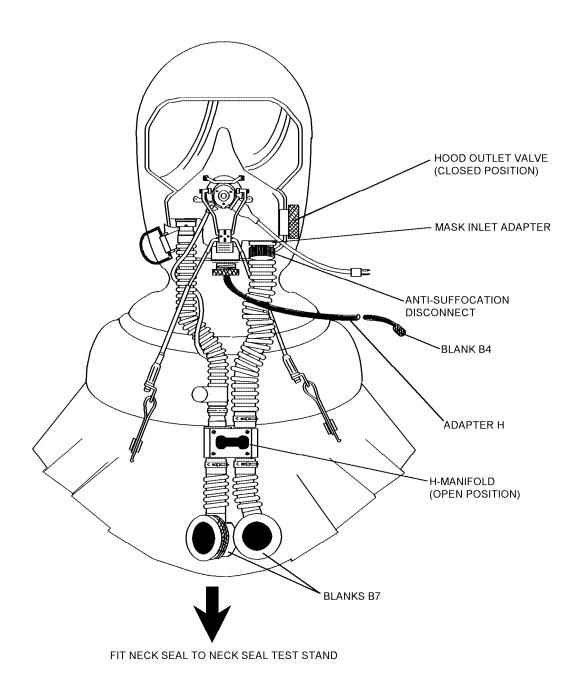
(V)2 thru (V)4 Variants - Mask Assembly - Overall Leakage Test
